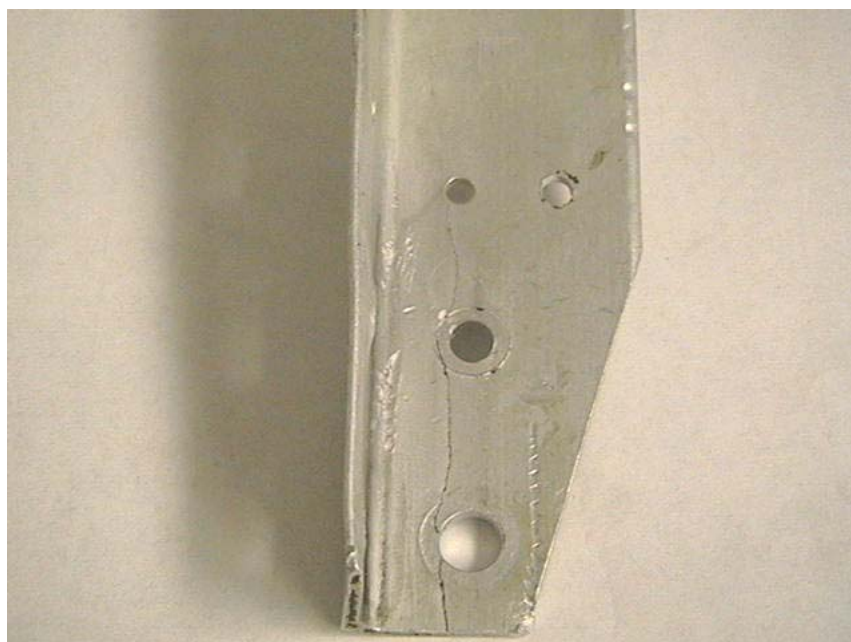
Crack in the Cessna 402C Right Stub Wing Angle Common to the Outboard Rib and Carry-Through Structure
